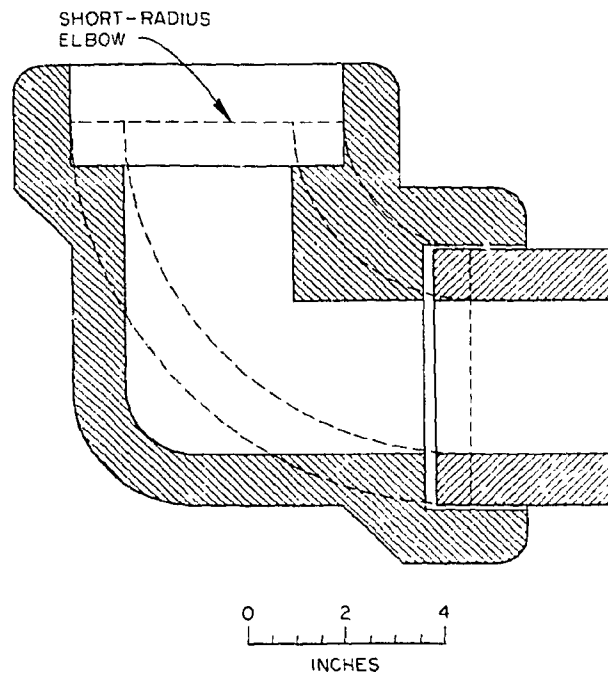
ANSI B16.11 90° elbow, 1-in., 6000-lb-class, sched-160 pipe.
